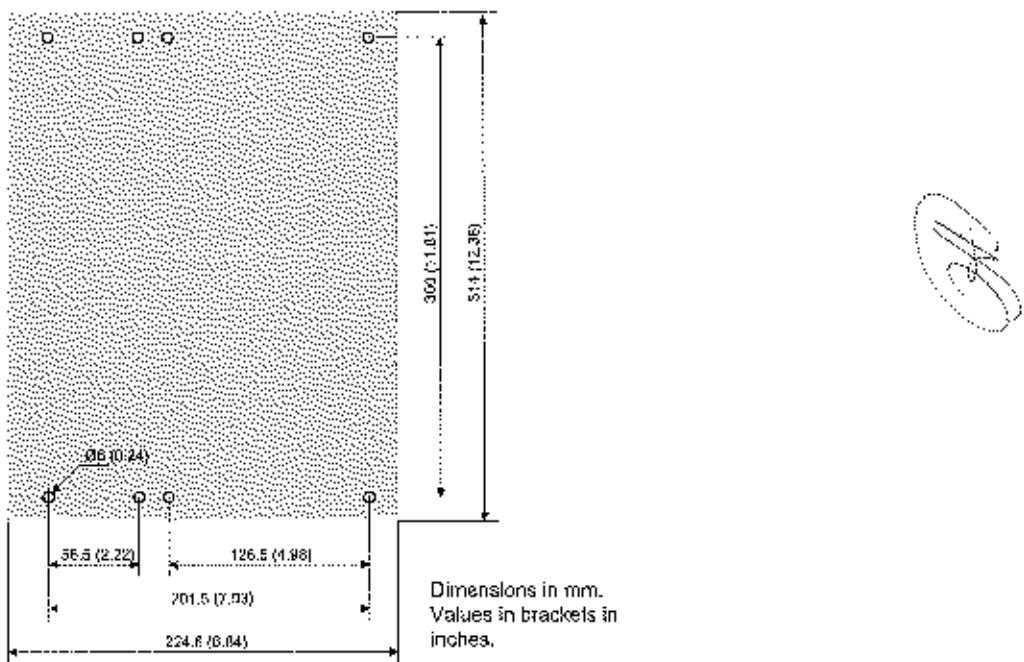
Drilling Pattern of a 1/2 Surface-Mounting Device – 1st Device Row
